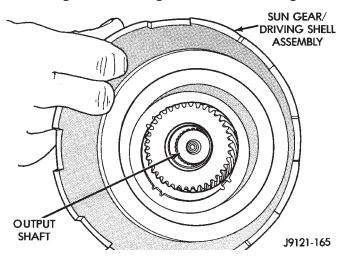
Installing Assembled Sun Gear And Driving Shell On Output Shaft
